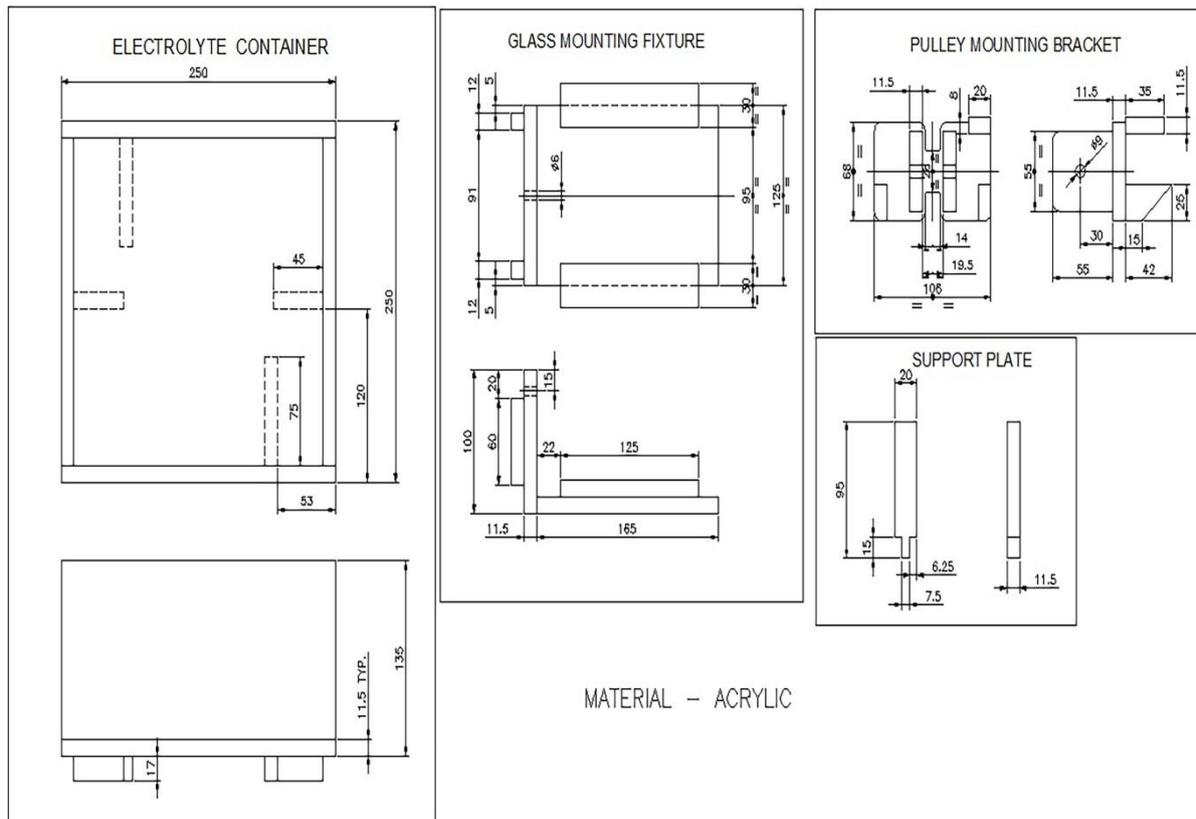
Electrolyte container, Workpiece mounting fixture, Pulley mounting bracket and Support plate
